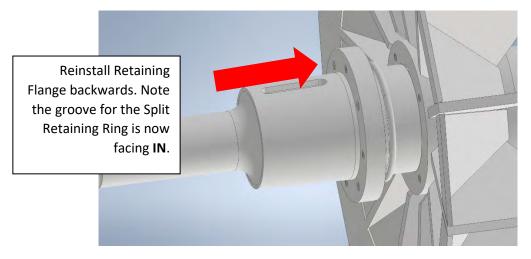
Reinstalling Flywheel Retaining Flange Backwards (BH)
